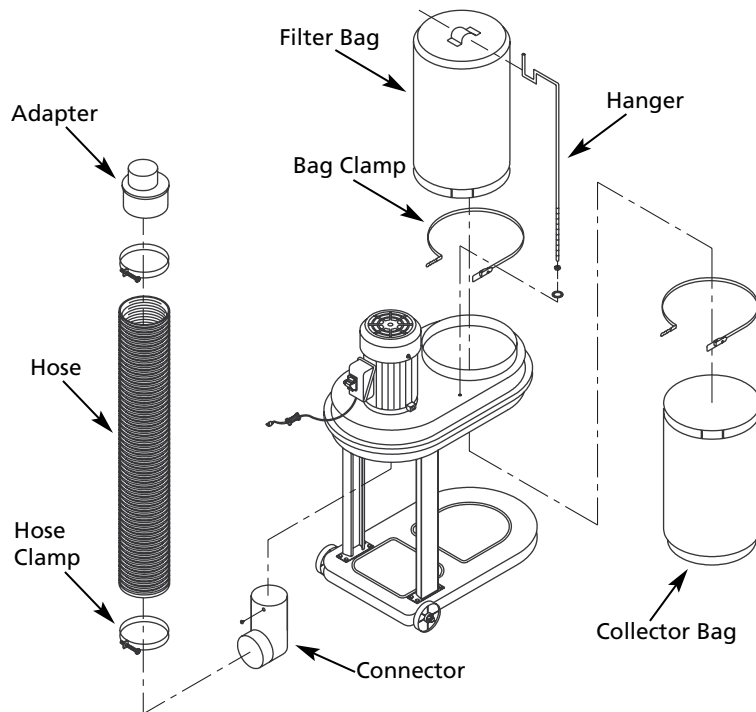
Mounting Hose, Adapter, Connector and Bags
